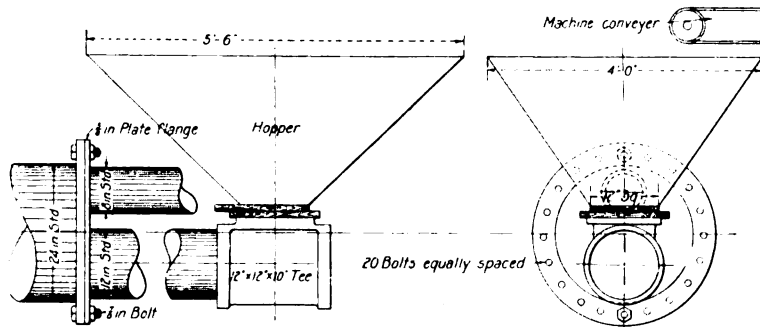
ARRANGEMENT OF 8-IN. AND 12-IN. PIPES AND HOPPER AT END OF 24-IN. PIPE LINE
